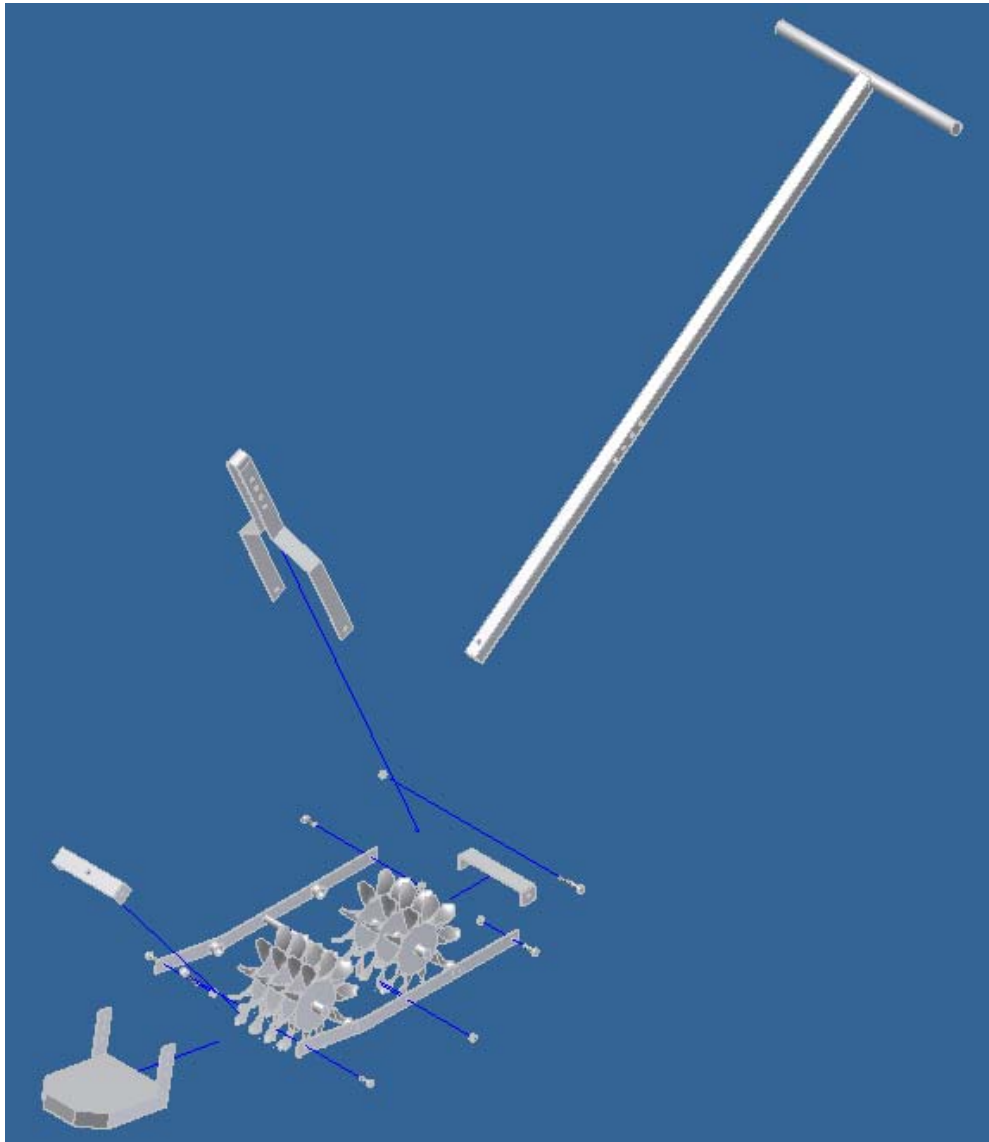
Positioning of important parts of the Twisted-Spike Floating Weeder
